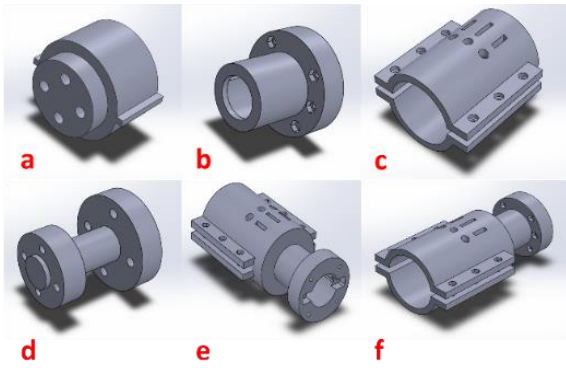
a: Load cell front cover design, b: Load cell outer sheath design, c: Drill motor outer sheath design, d: Load cell and robot attachment design, e: Drill holder design for robot assembled, f: Drill holder design for robot assembled version.
